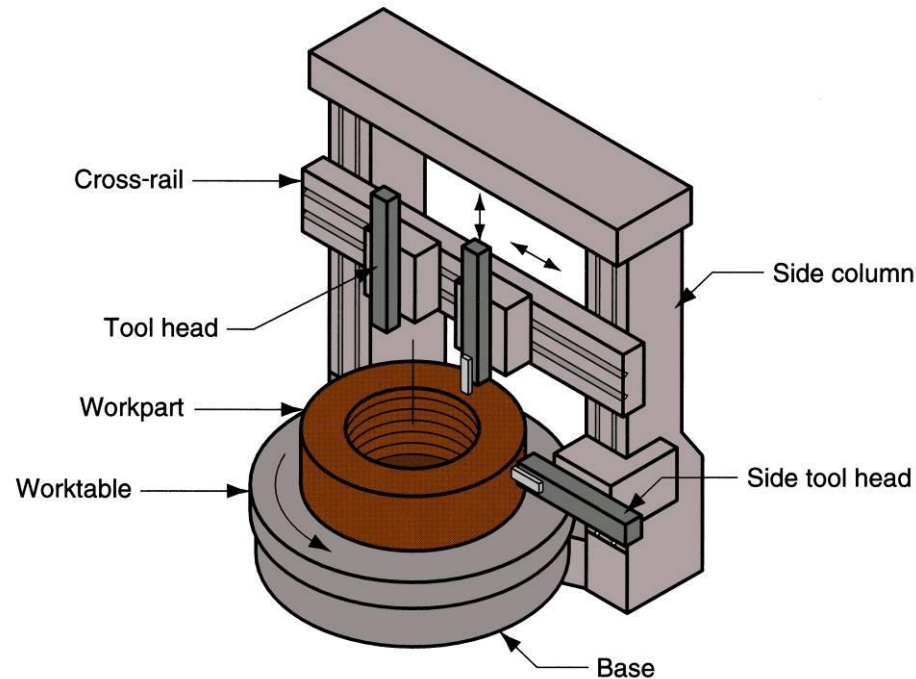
A vertical boring mill – for large, heavy workparts.
